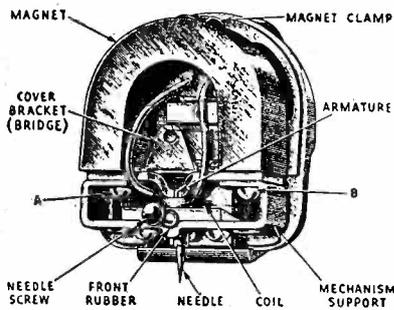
The parts composing the pickup are marked. Adjustments are made at "A" and "B"
